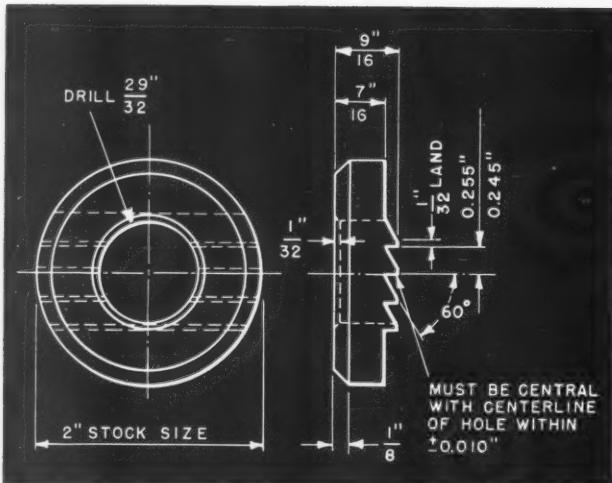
Serrated washer for a cylindrical grinding machine, which is accurately and securely held during milling by means of the fixture shown in Fig. 2
